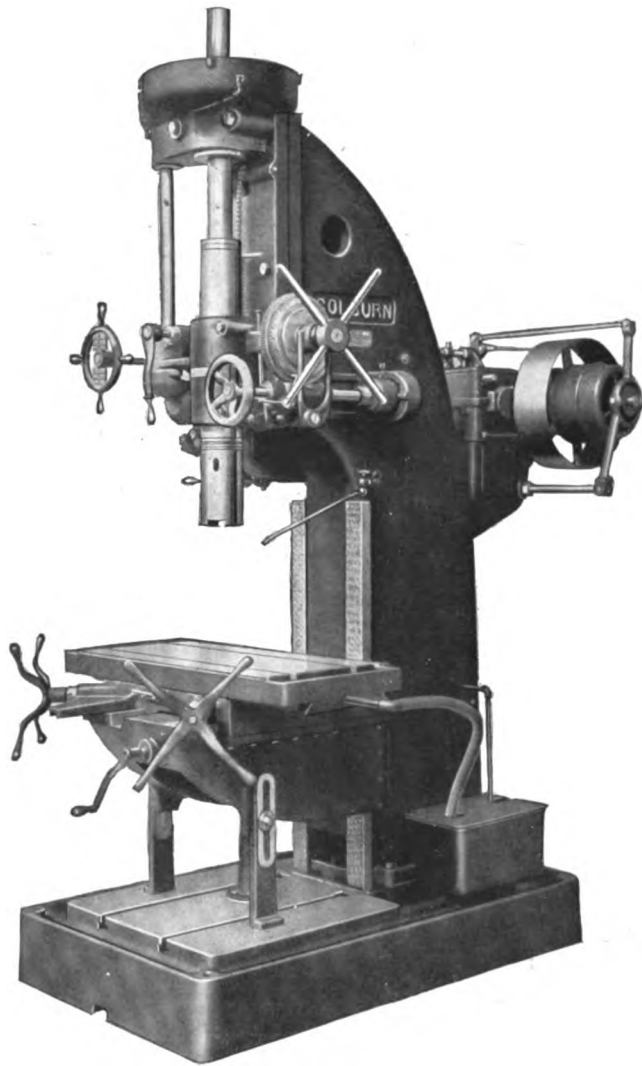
D8 HEAVY DUTY DRILL PRESS WITH COMPOUND TABLE, SWING 36 in. (914 mm.). CAN BE FURNISHED WITH PLAIN TABLE AND MOTOR DRIVE, ALSO WITH TAPPING ATTACHMENT AND TAPPING HOOD
